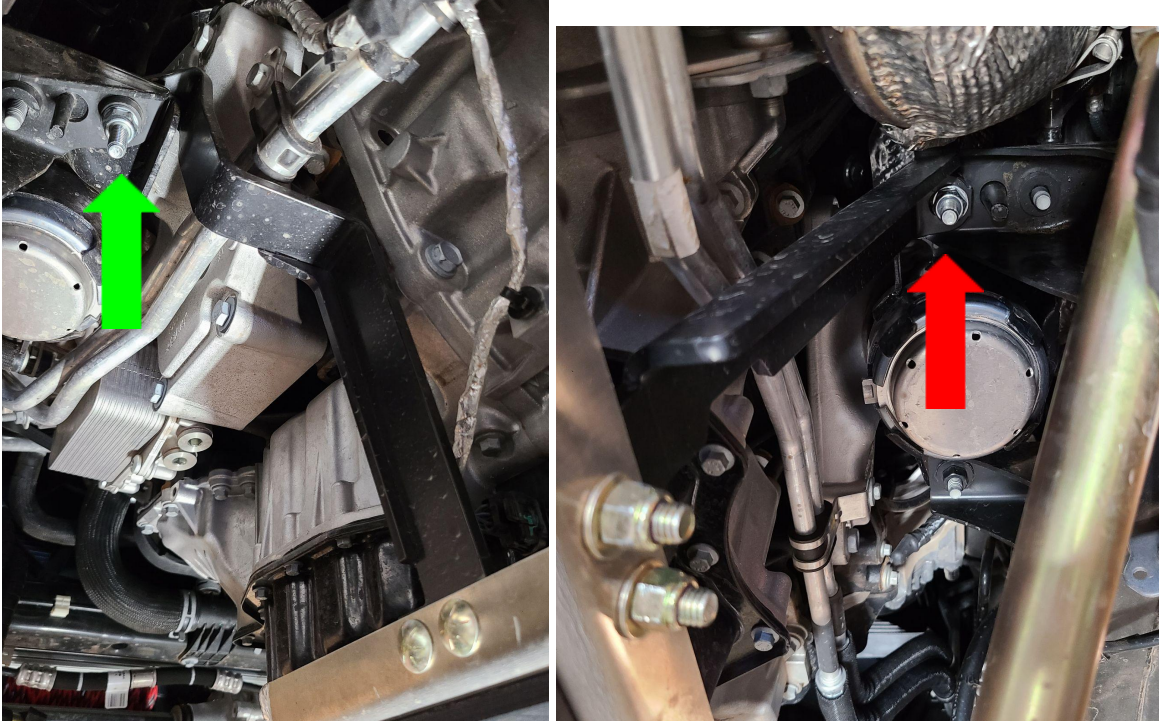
Orientation of Engine Skid Brackets. Left: Driver side engine mount bracket is installed above the engine mount (green arrow). Right: Passenger side engine mount bracket is installed below the engine mount (red arrow)
